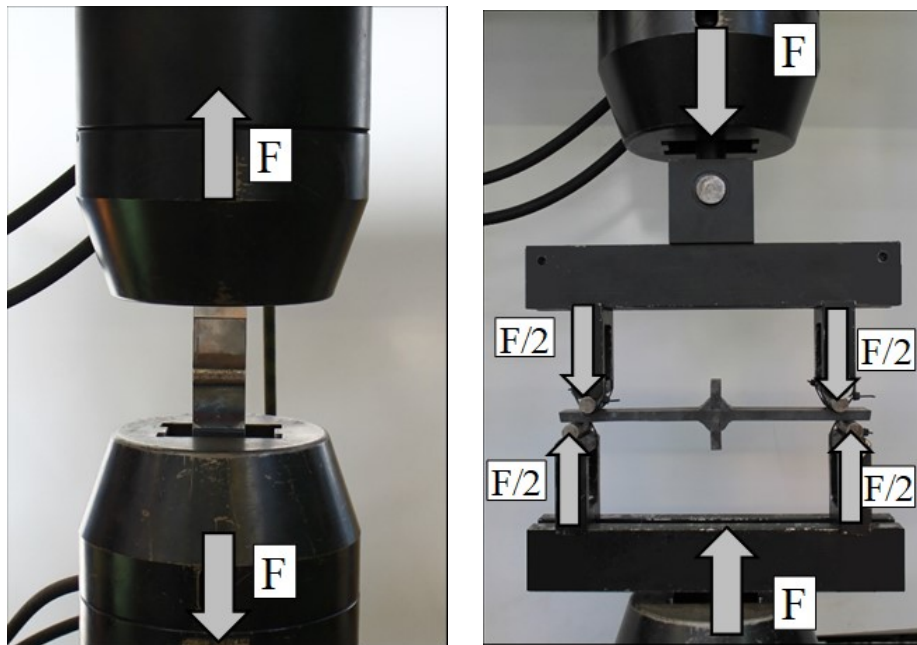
The MFL machine employed for the fatigue tests. On the right, a partial-penetration butt-joint tested in the axial fatigue test machine under axial loading. On the right, a cruciform nlc fillet-welded joints tested in the fatigue test machine under four-point bending loading by means of a dedicated loading fixture.
